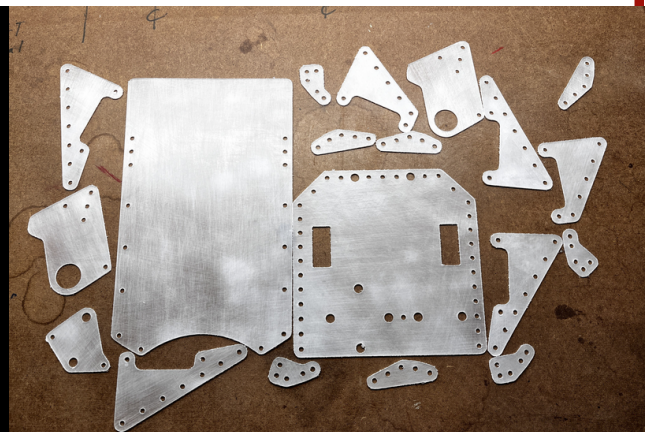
Image of the Lexan pieces cut out using CNC manufacturing.
